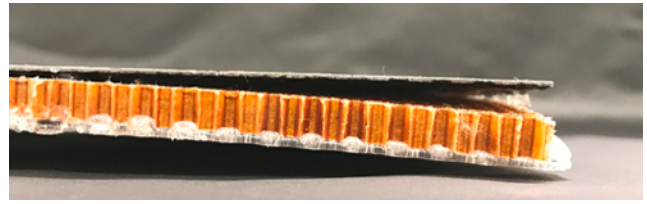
Visual inspection of the composite lightweight module produced using a bad sandwich adhesive.
